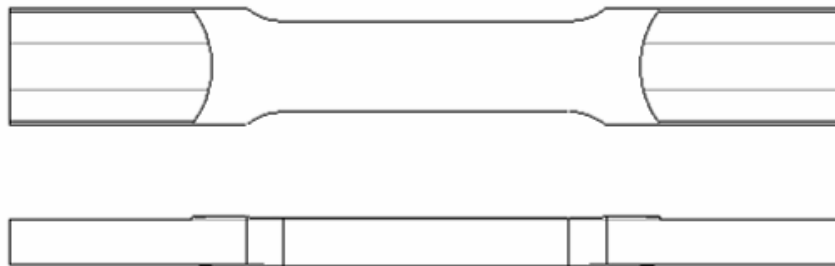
Specimen geometry for transverse tensile testing of welds on X100 pipes
